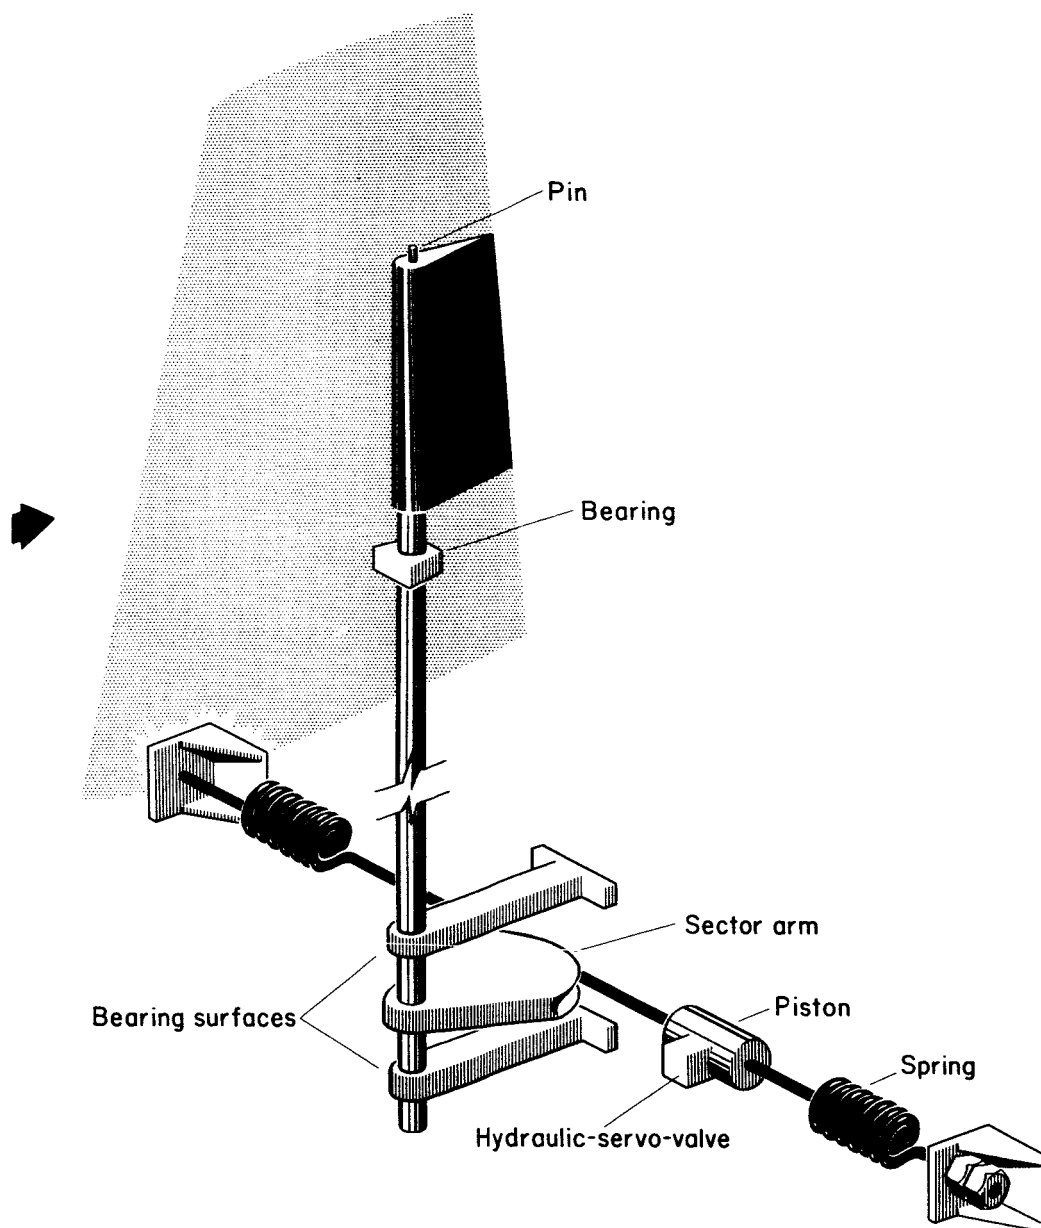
Schematic drawing of the mechanical details of the control-surface drive system.
